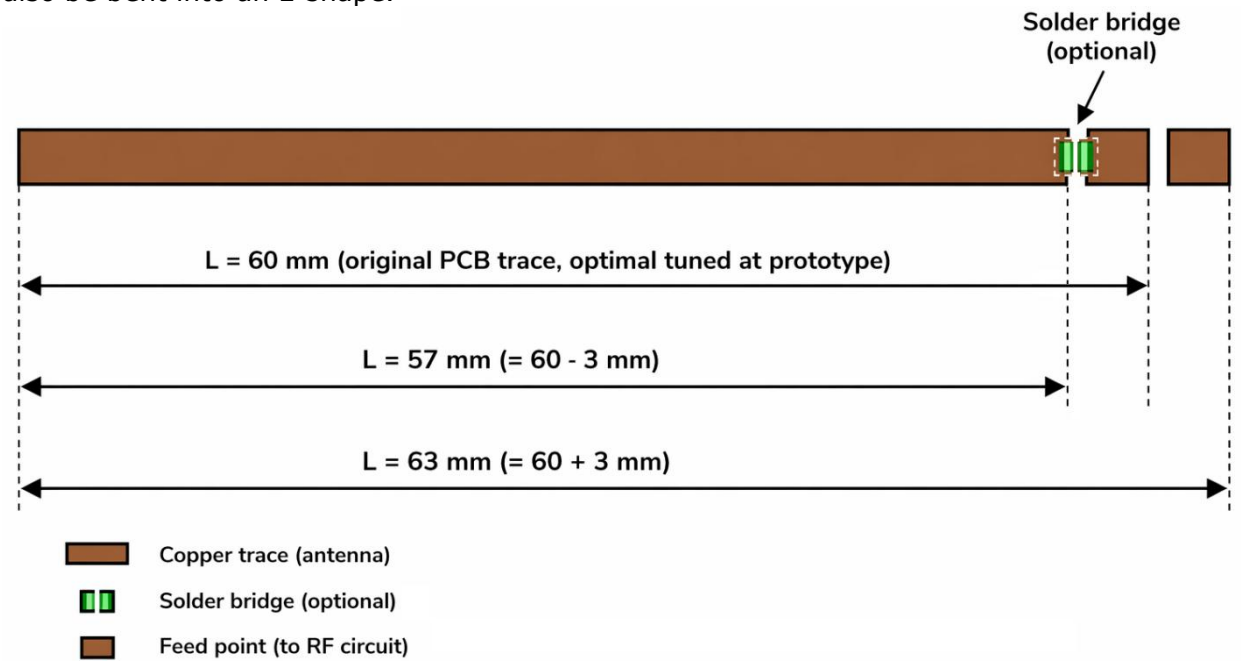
Example of PCB Antenna Length Fine Tuning Using Solder Bridges
